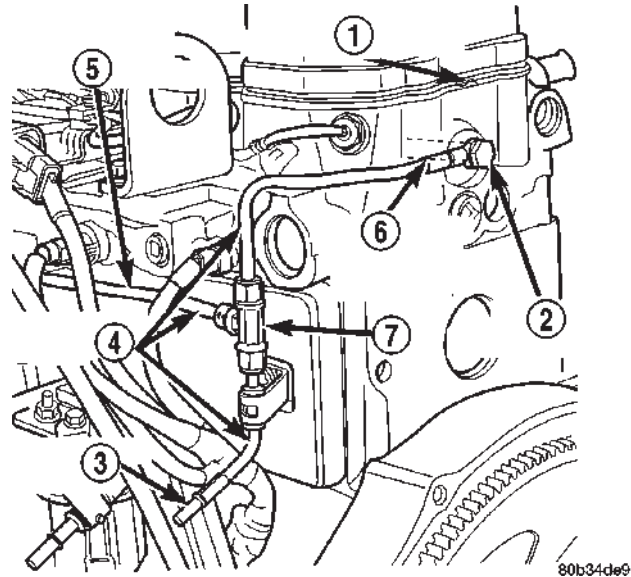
Fuel Return Line at Rear of Cylinder Head
